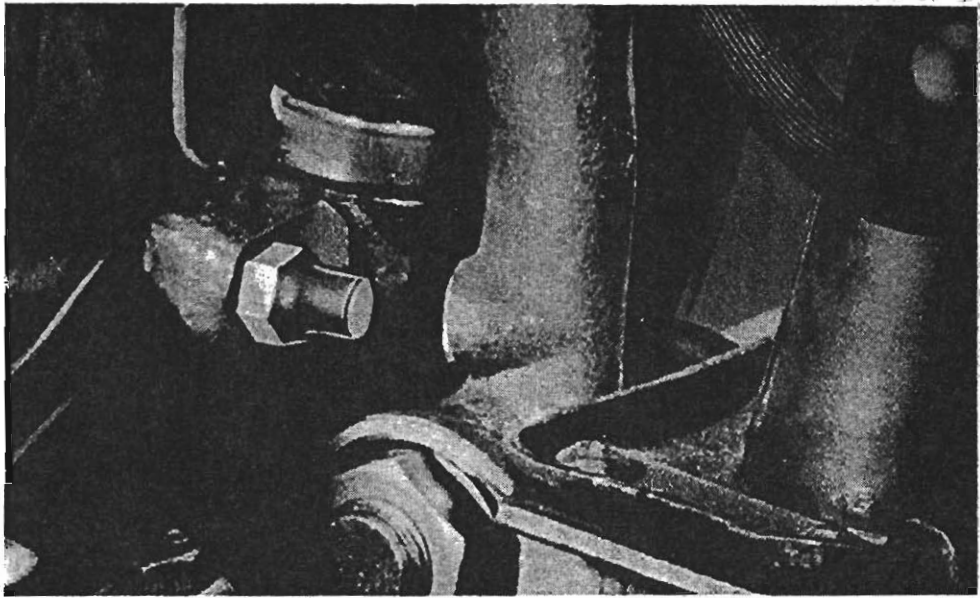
The Lower Rear Retaining Screw Acts as a Stop and Must Be Installed in the Location Shown.
